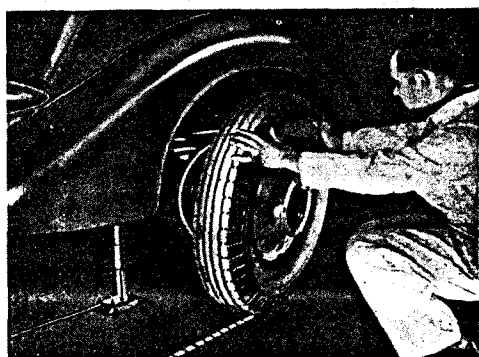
To remove a rear wheel, it should be pushed in at the front and rolled out toward the rear of the car.
